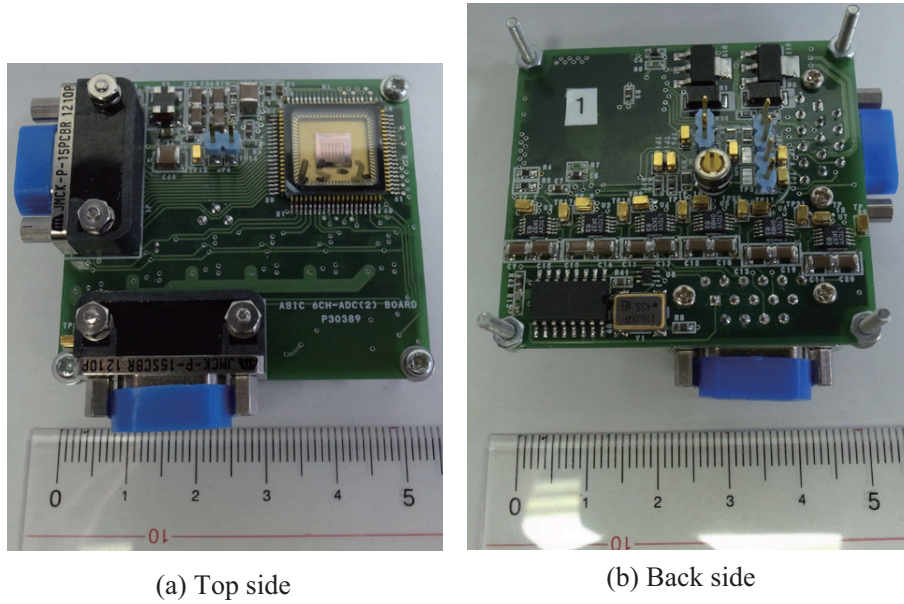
Photographs of both surfaces of the fabricated waveform receiver.
